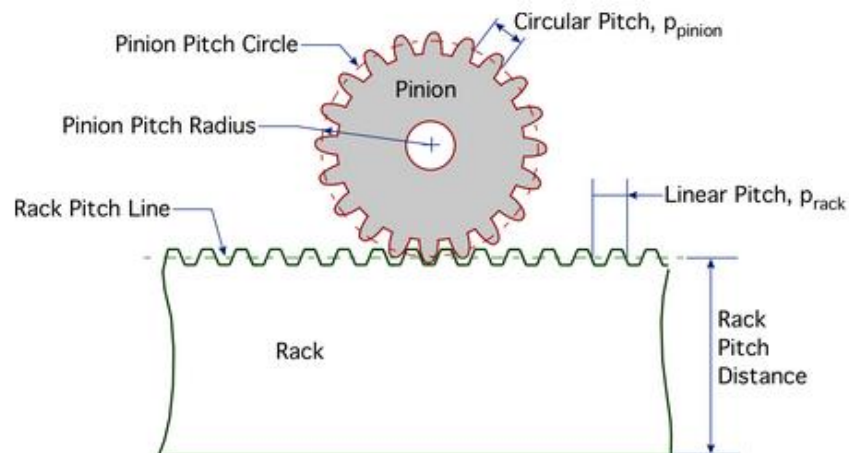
Kinematic Definitions for Rack and Pinion Gear Set
